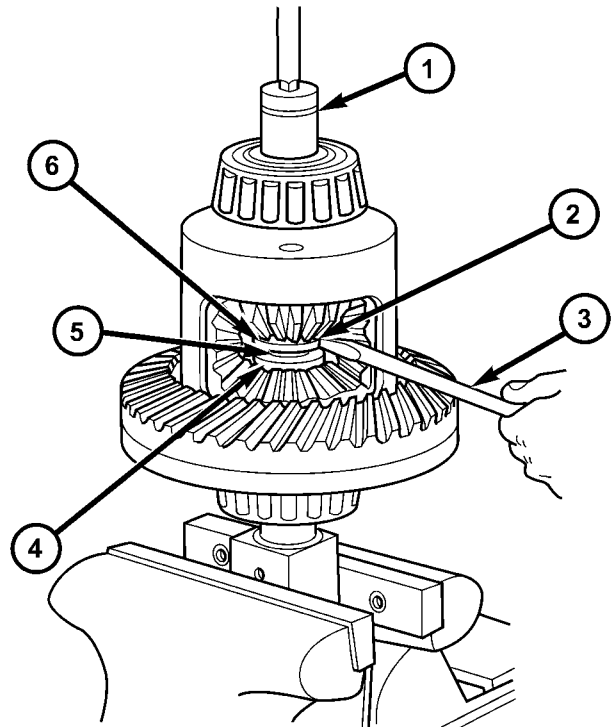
TRAC-LOK TOOLS ASSEMBLY
